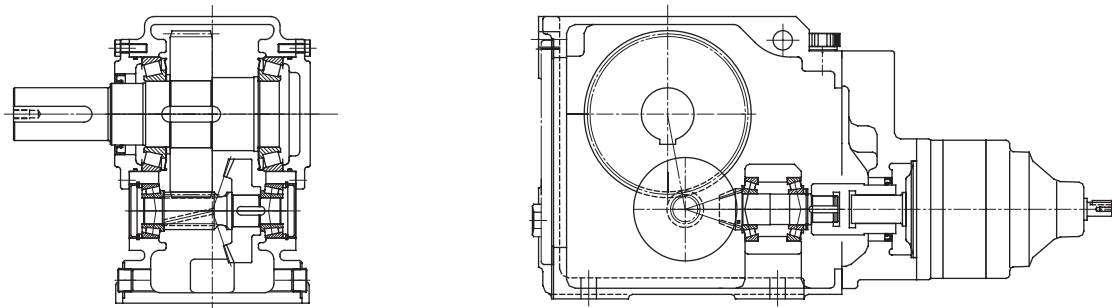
Foot Mount Type Reducer (Example: KHH-72DAR-K1)
